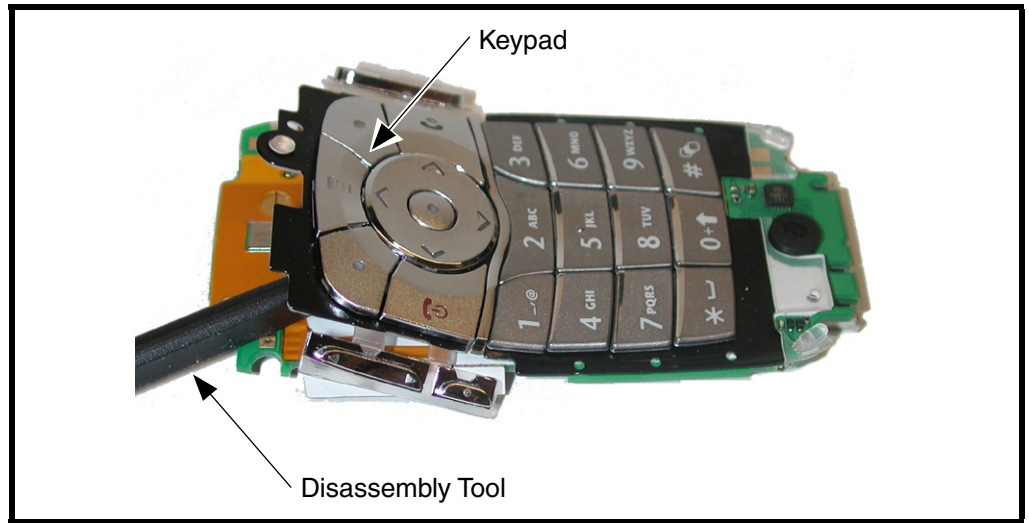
Removing the Keypad, volume/smart, and voice buttons
